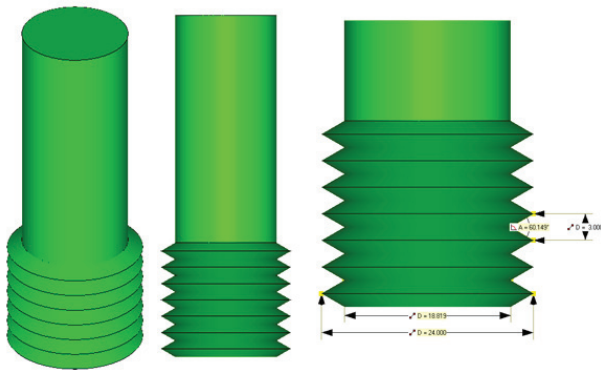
Virtual thread milling cutter: simulated-aided design of a thread milling cutter for the screw thread ISO M24 x 3.
